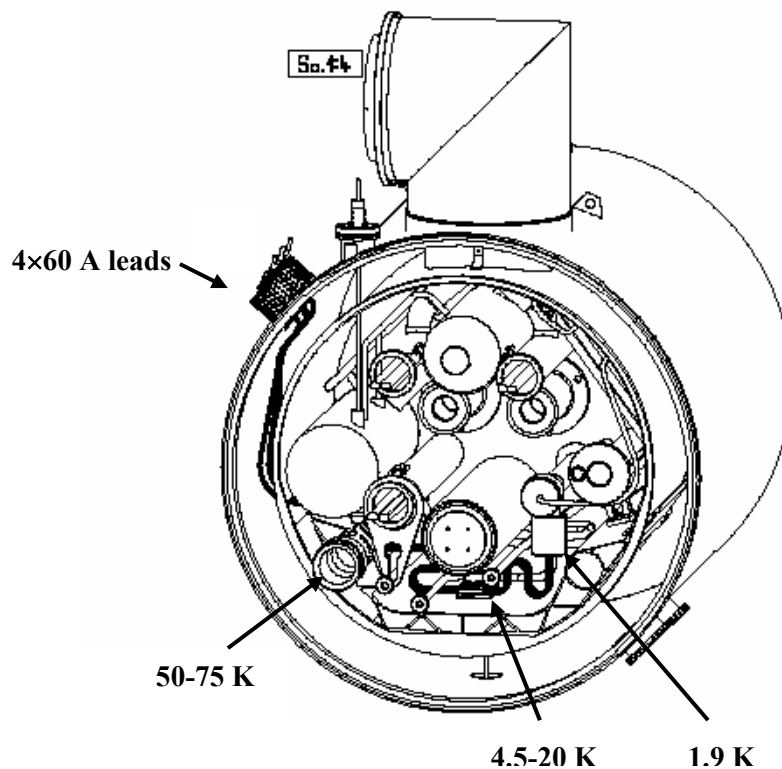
Assembly of four 60 A leads integrated in the final cryostat
